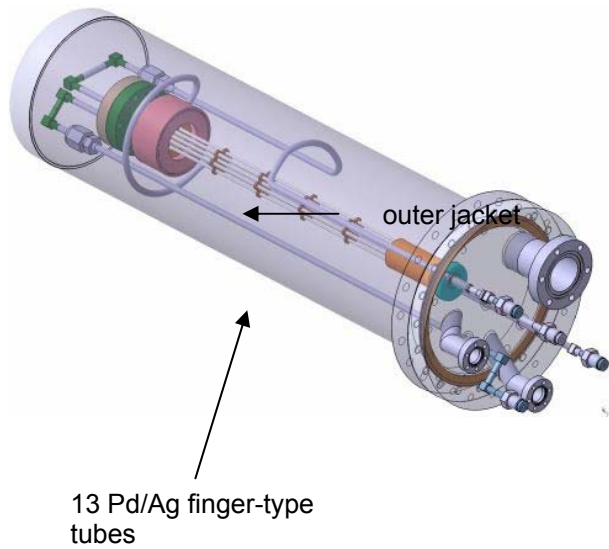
Current 3D drawing of the next technical (multi-tube in a common single catalyst bed) PERMCAT reactor.
